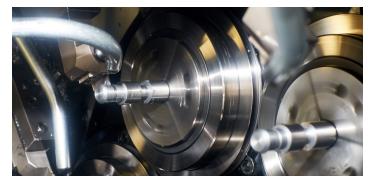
Crossed roller bearings are used in spindle heads and other rotating parts in machine tools and CMM machining centers.
